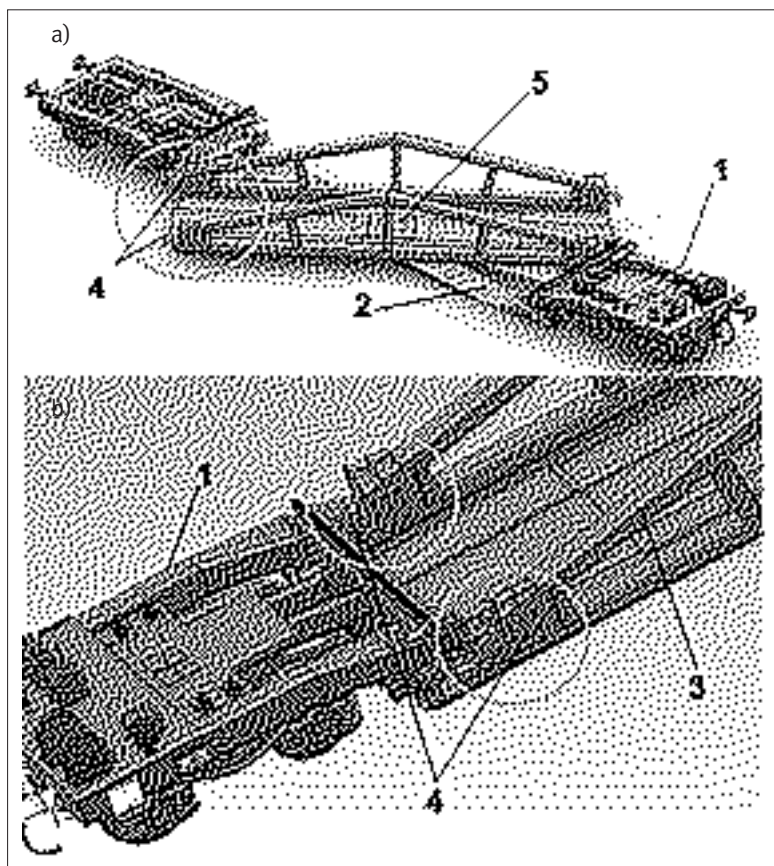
Prototype version of the wagon with :a) the open loading platform, b) the closed loading platform with the view of lock components: 1 – over-bogie part of the wagon , 2 – the lowered fixed frame of wagon , 3 – the side of the moving loading platform, 4 – hook shape locks with support area , 5 – central node of the rotatable platform
